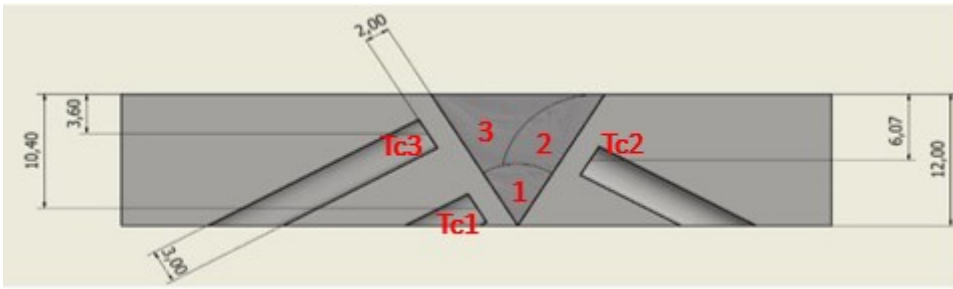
Schematic illustration of cross-sectional view of thermocouple placement.
